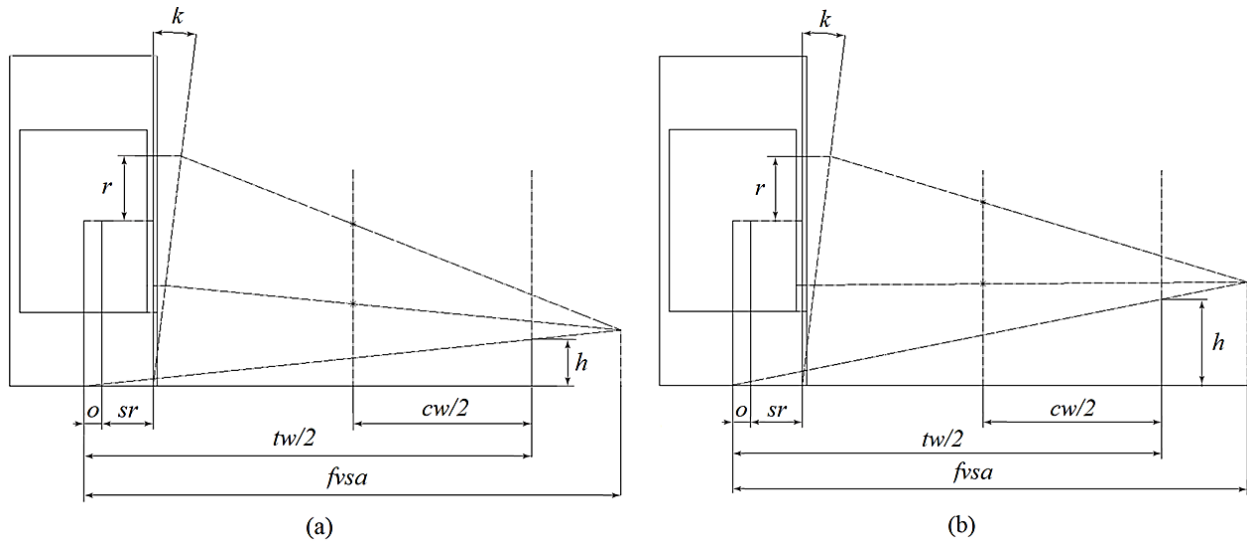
Front view of the suspension geometry for the (a) front axle and (b) rear axle.
